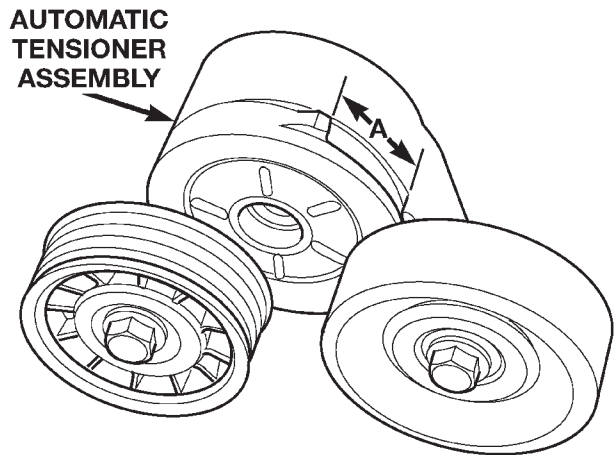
Accessory Drive Belt Wear Indicator—4.7L Engine
